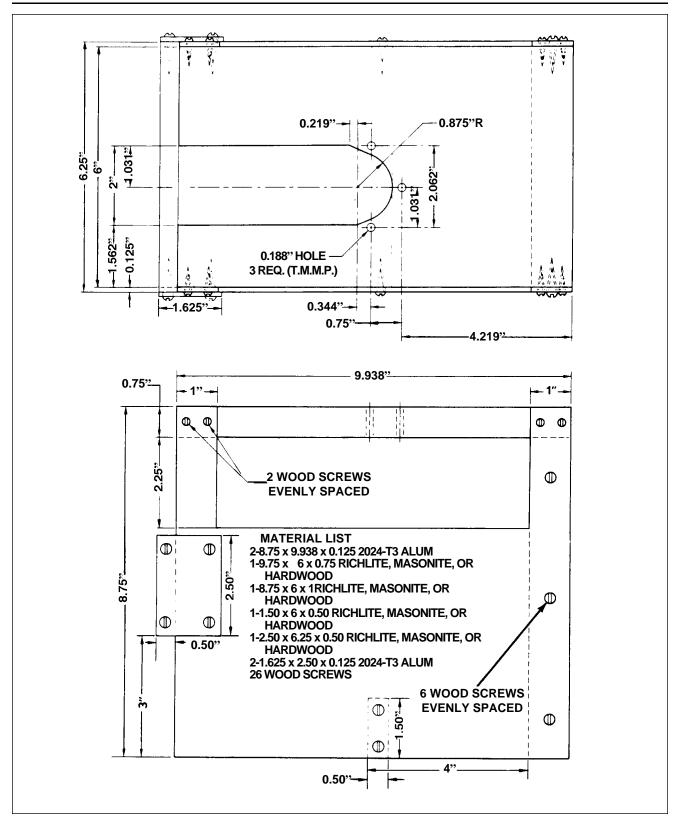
Fuel Quantity Transmitter Checking Jig
